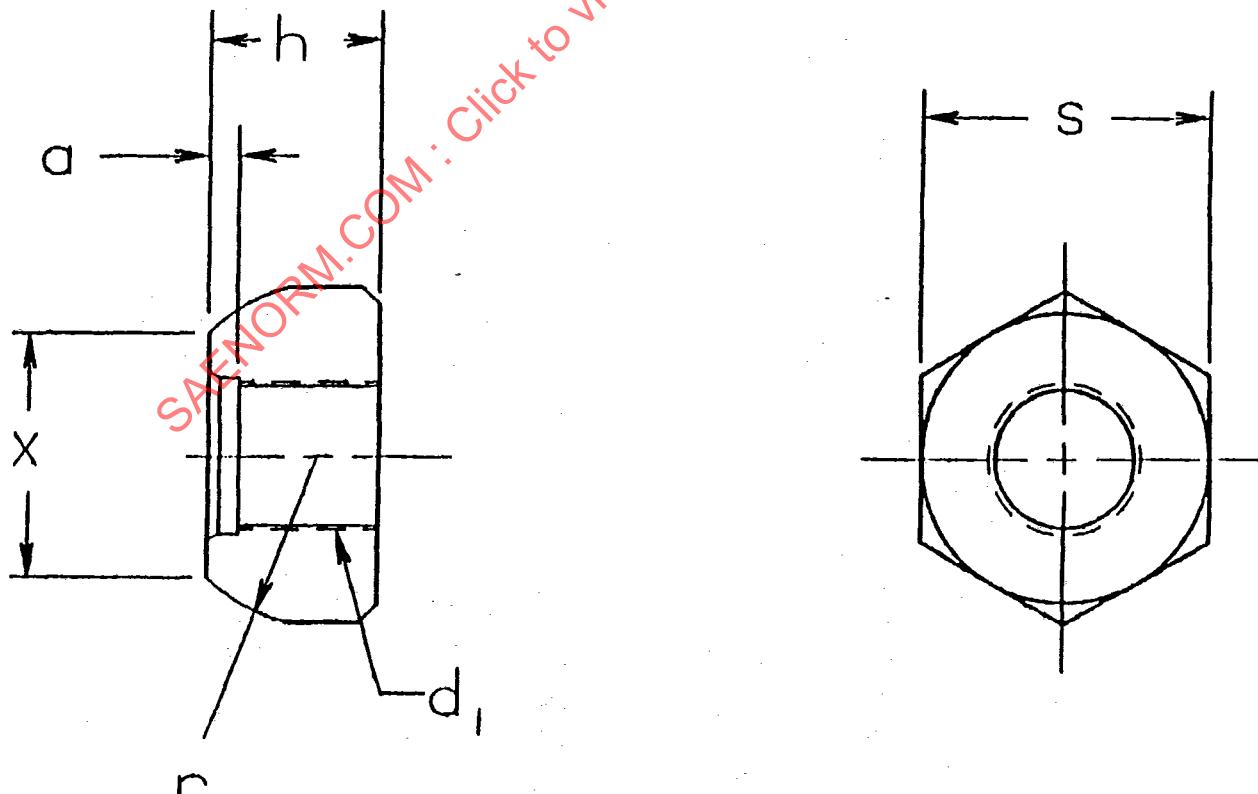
Single or Outer Dual Ball Seat Nut for Ferrous Wheels
